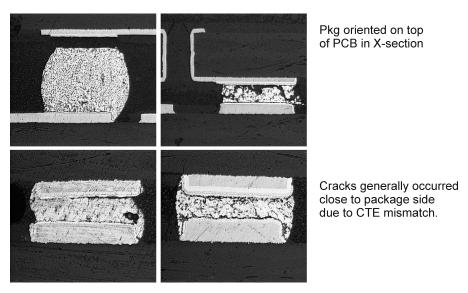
Laminate CSP Solder Joint Failure Mode in TMCL
